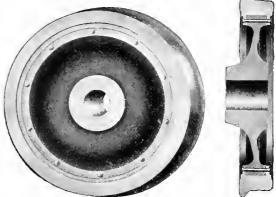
Cast Iron Plate Center, Held by Shrinkage, Mansell Retaining Rings Standard Steel Works Co. and Bolts.
